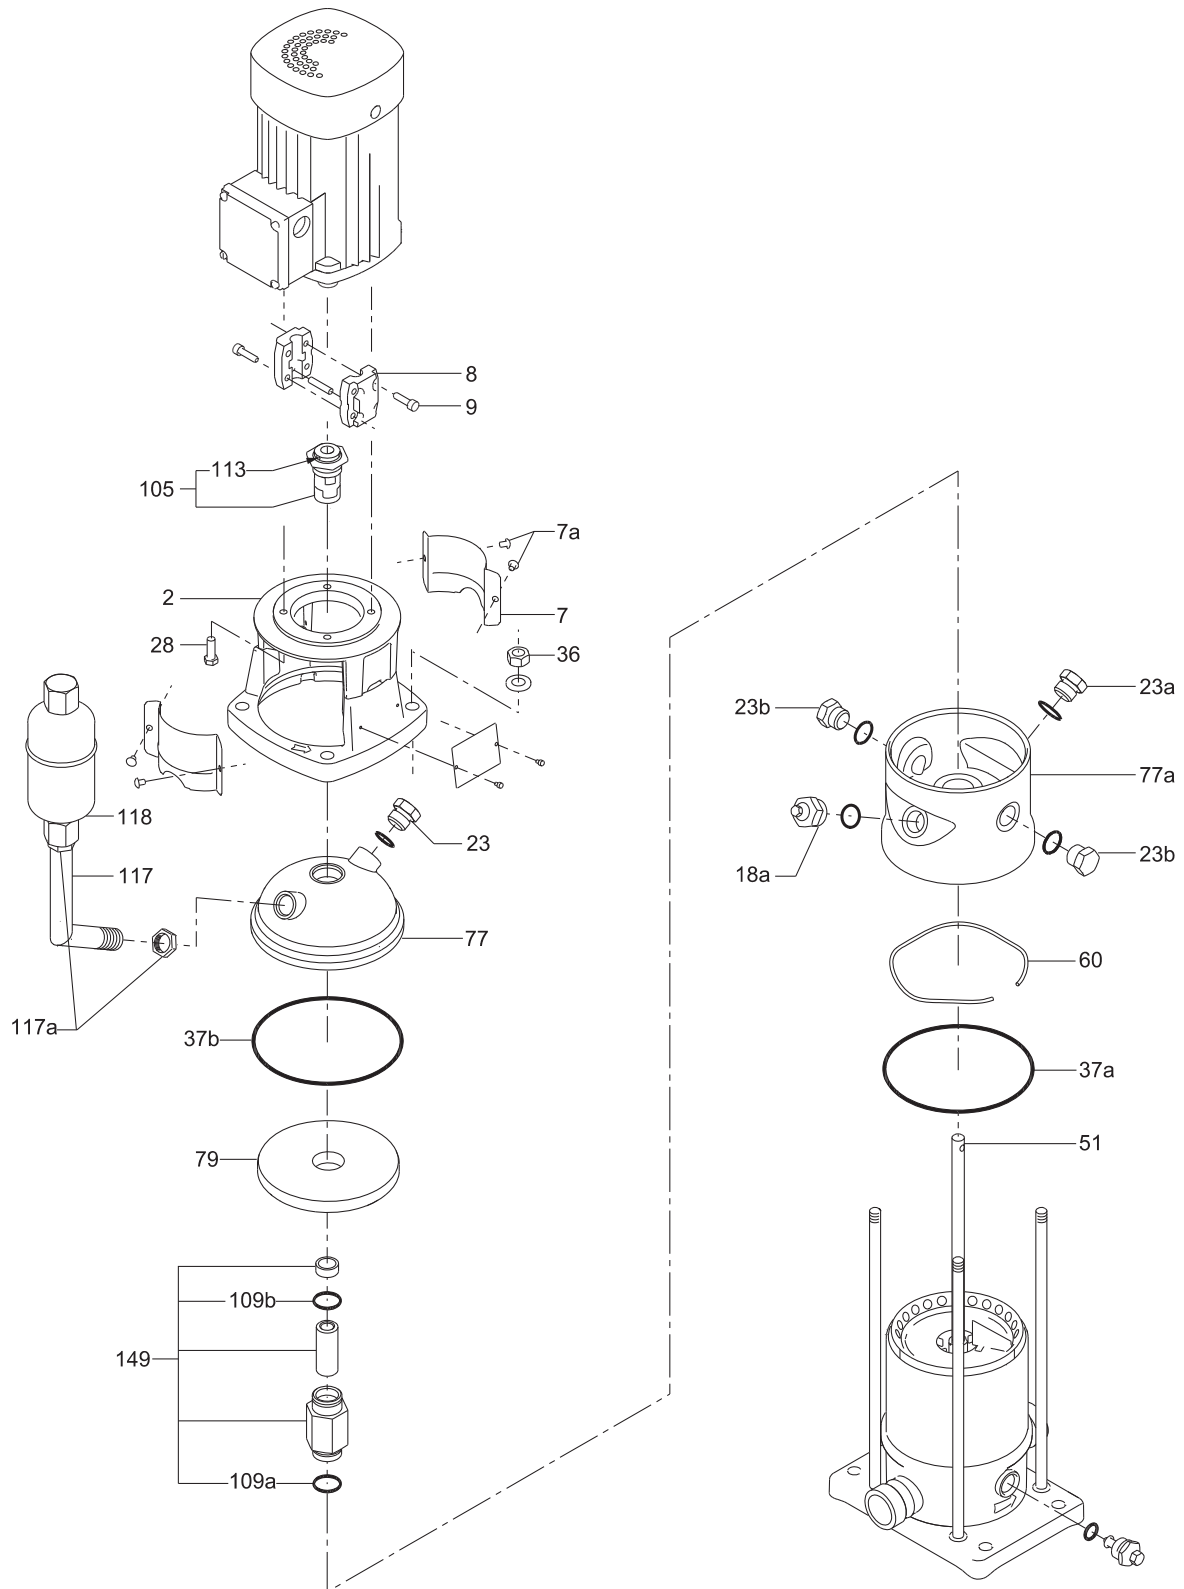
Exploded view, CRI, CRN 1, 3, 5
